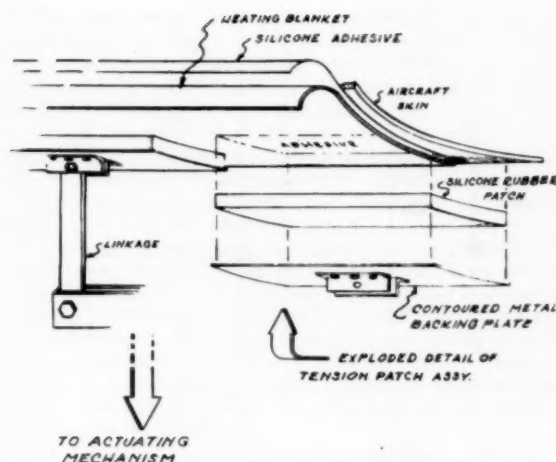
EXPLODED VIEW OF HEATING AND LOADING SYSTEM USING HEATING BLANKETS
